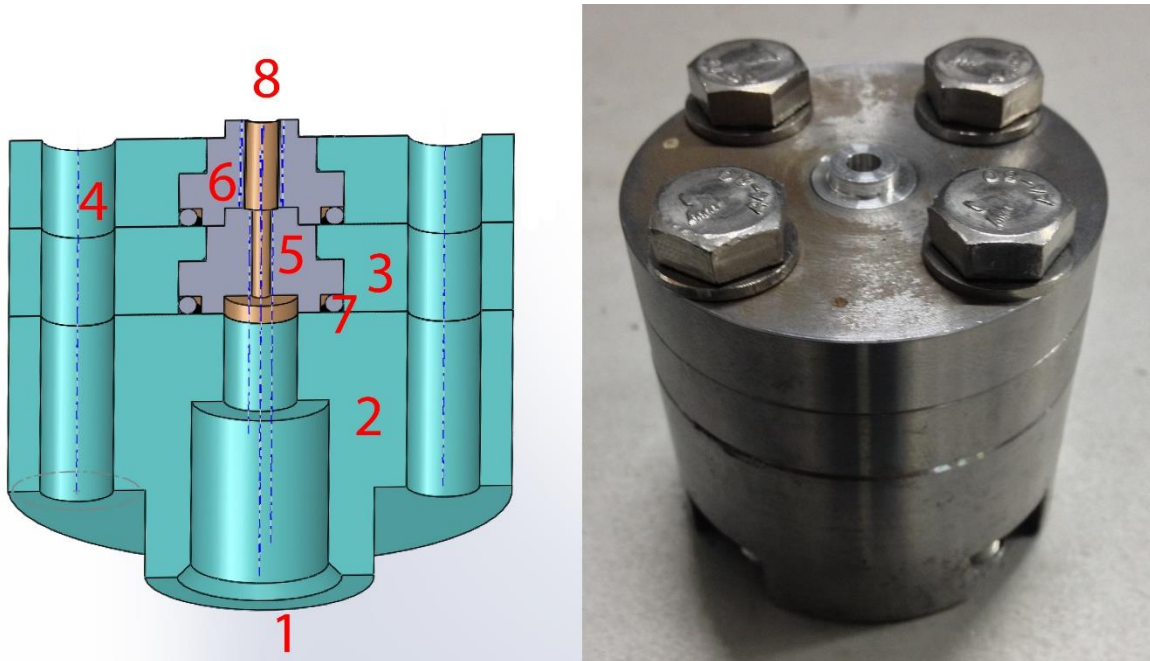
Left: Mechanical drawing of nozzle configuration: 1) Gas inlet and pipe connection, 2) Base housing, 3) Nozzle housing, 4) Bolt threading, 5) Upstream nozzle 6) Downstream nozzle 7) Seal/Packing, 8) Gas outlet, right: Experimental nozzle setup.
